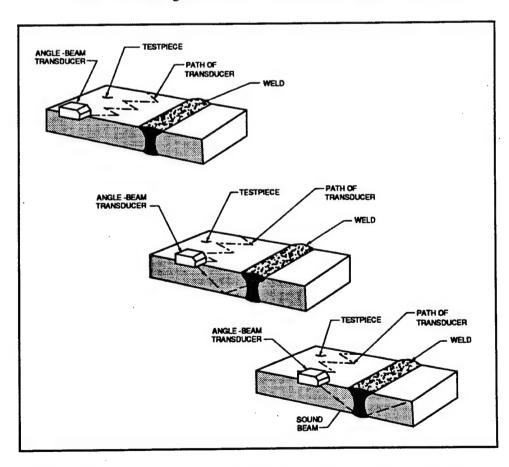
Scanning path of ultrasonic transducer for weld inspection (after ASM (1989))
